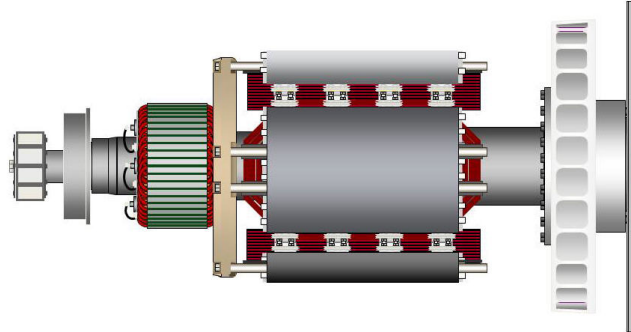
ONE BEARING ALTERNATOR ROTOR SHOWING COUPLING DISCS BOLTED TO DRIVE END COUPLING HUB (AT RIGHT)
